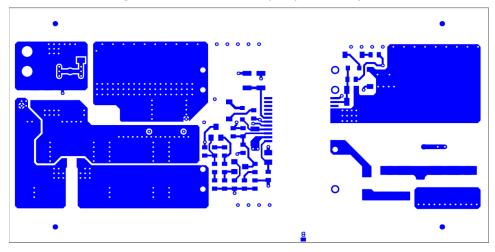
RDR-85SLR Bottom Layer PCB Layout.
